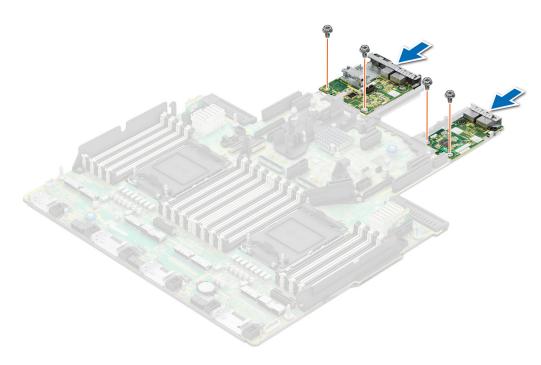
Installing the LOM card and Liquid cooling rear I/O board $\,$
